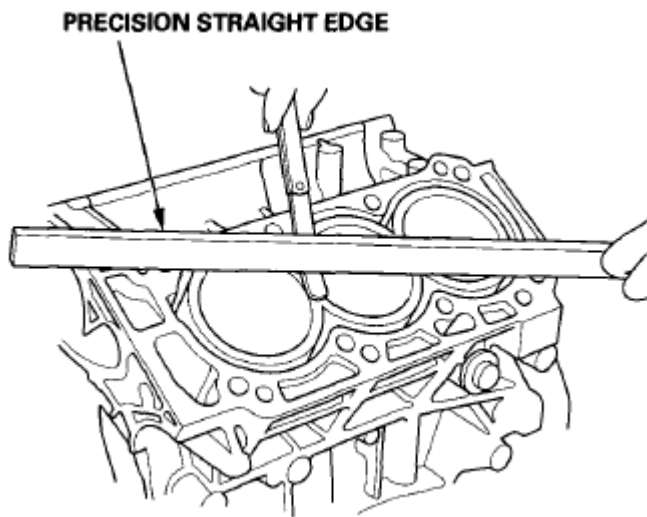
Checking Top Of Engine Block For Warpage Using Precision Straight Edge
